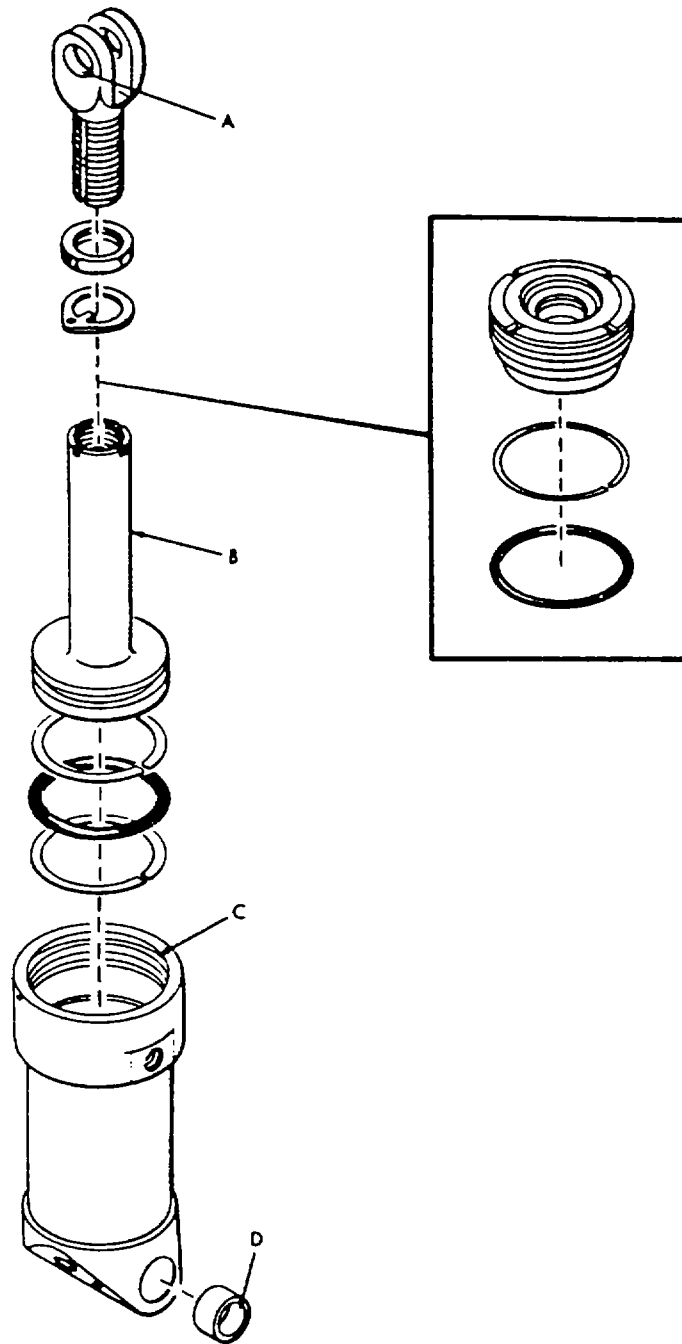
Elevation Cylinder Retainer Assembly Removal Using Spanner Wrench
